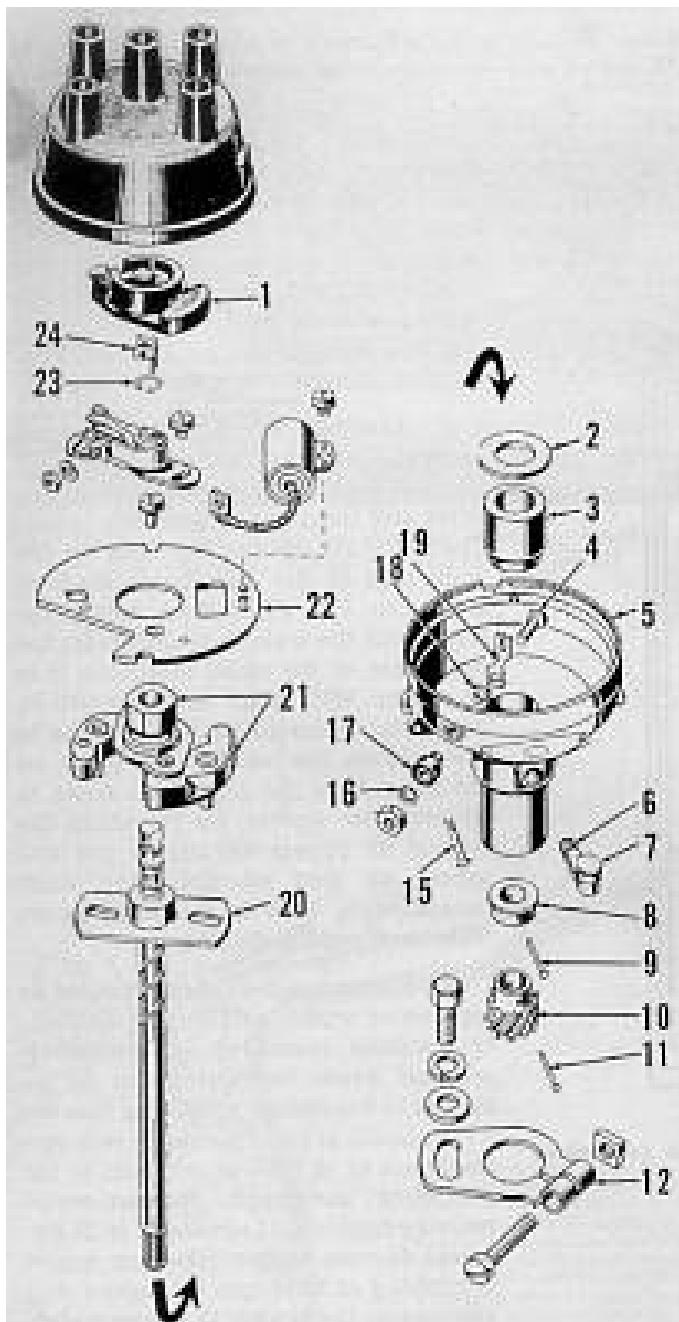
Angle-mounted distributor used on 8N tractors after serial 263843.
